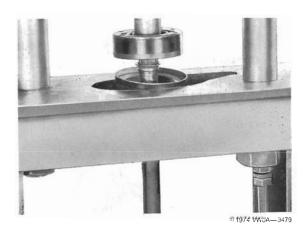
Constant velocity joint being pressed onto the driveshaft with a sleeve-type driving tool. Though shown here, the dished washer used on 1968 through 1974 driveshafts should not be reinstalled.
